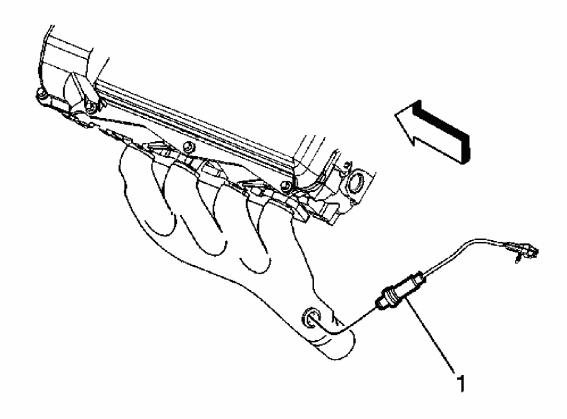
Identifying Oxygen Sensor Courtesy of GENERAL MOTORS CORP.
